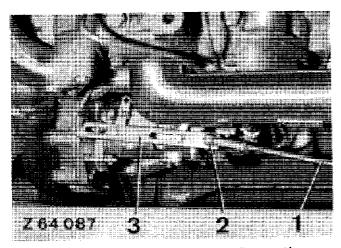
Removing Various Engine Connections Near Fuel Injection Pump (935 Shown)
